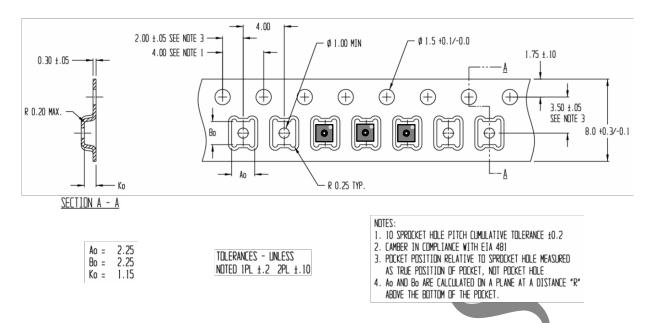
Technical drawing of the packaging tape with sensor orientation in tape. Header tape is to the right and trailer tape to the left on this drawing. Dimensions are given in millimeters.
